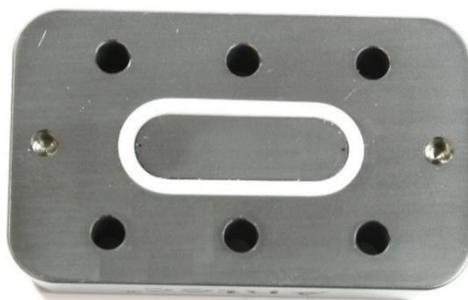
Bottom side of inlet block with Teflon O-ring installed.
